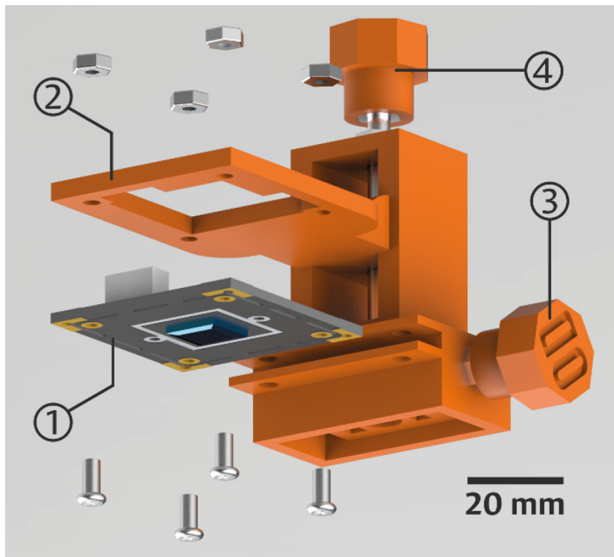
Digital camera module. ① Digital camera. ② 3D-printed housing. ③ Alignment screw. ④ Height control screw.
